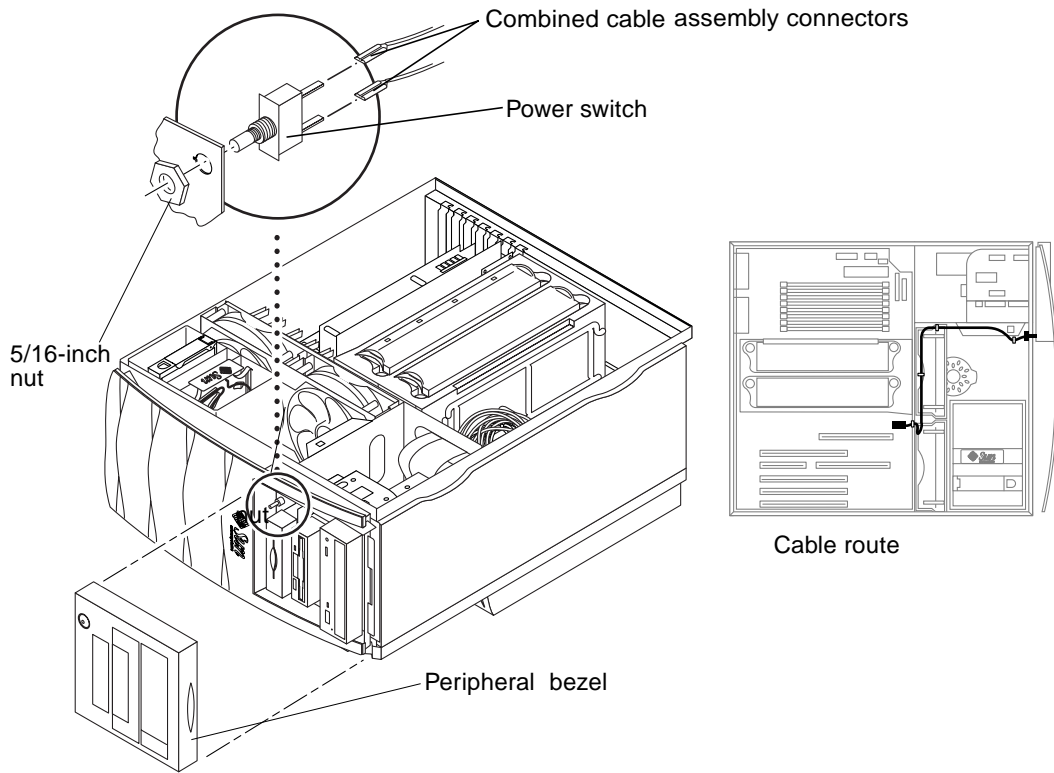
Removing and Replacing the Power Switch Assembly
